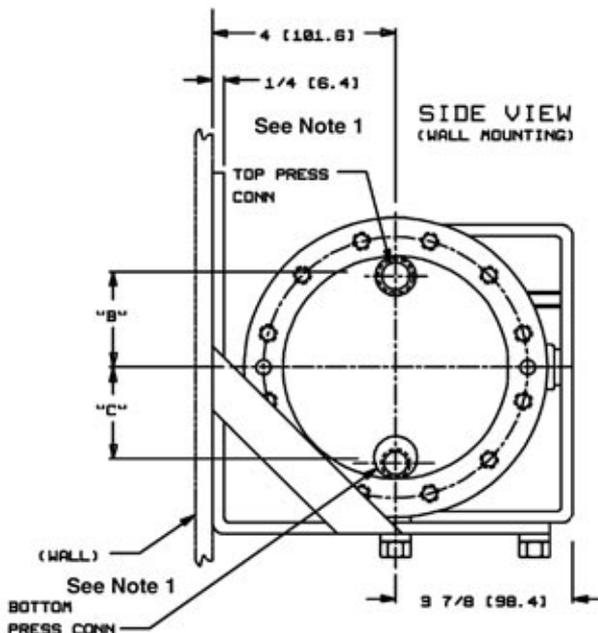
199 DPU Dimension Drawing (Part 2 of 2)
